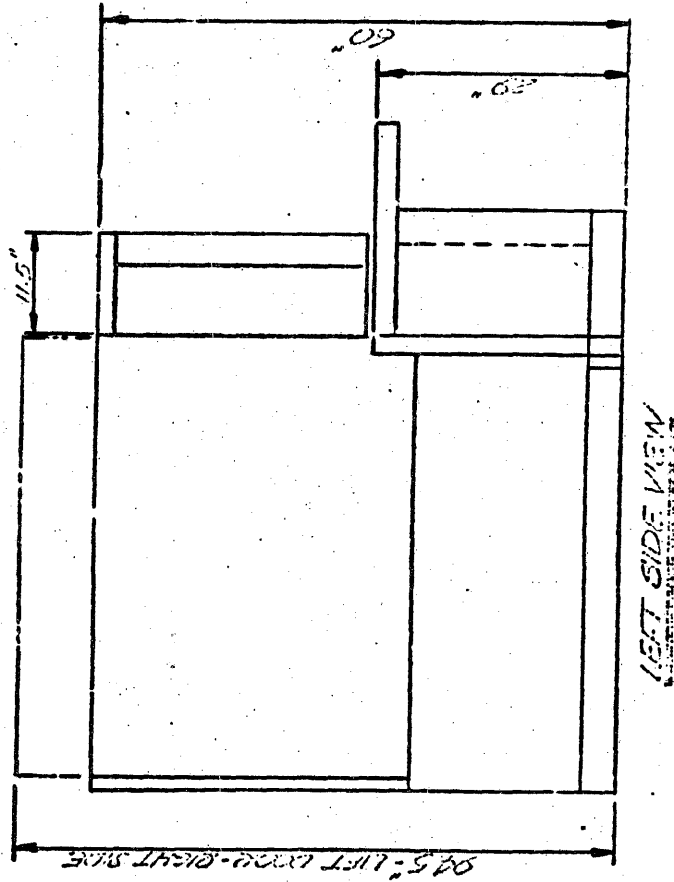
7300 PROCESSOR CABINET DIMENSIONS
